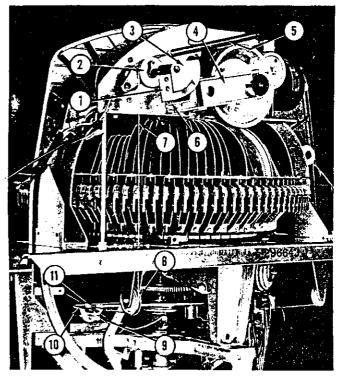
ADJUSTMENT, ACTUATING ARM AND CABLE TONE ARM AND TURNTABLE.
